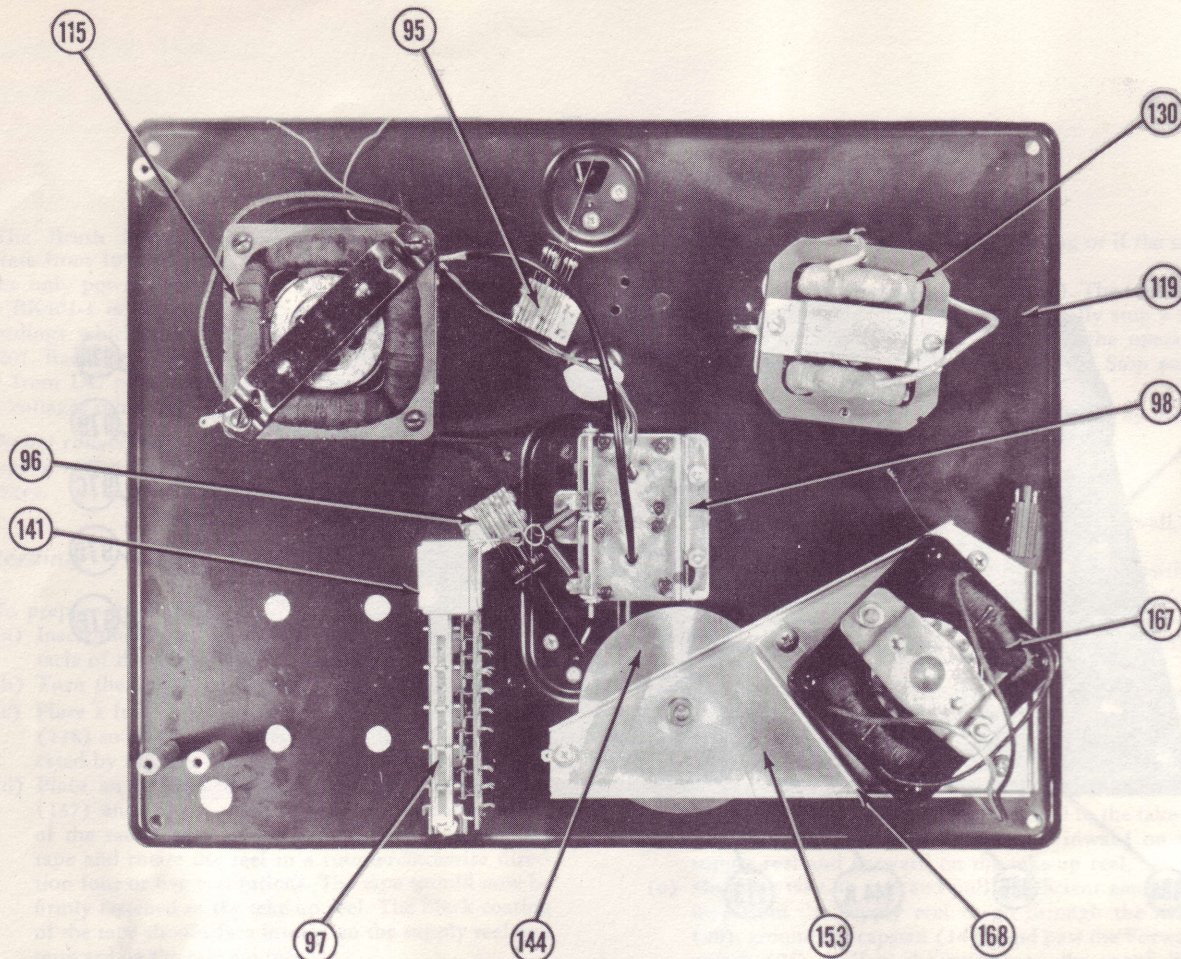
PANEL BOTTOM VIEW WITH AMPLIFIER UNIT REMOVED
